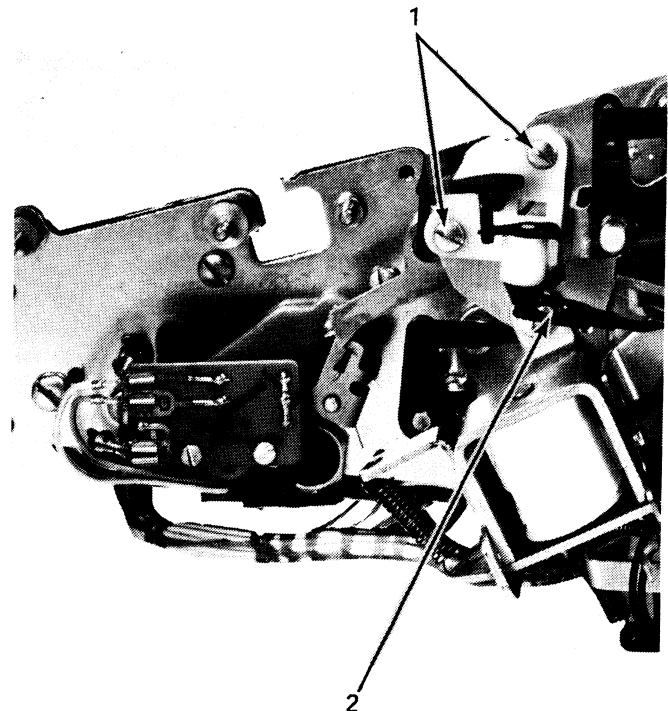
Keylever Removal (Right Side of Keyboard)
